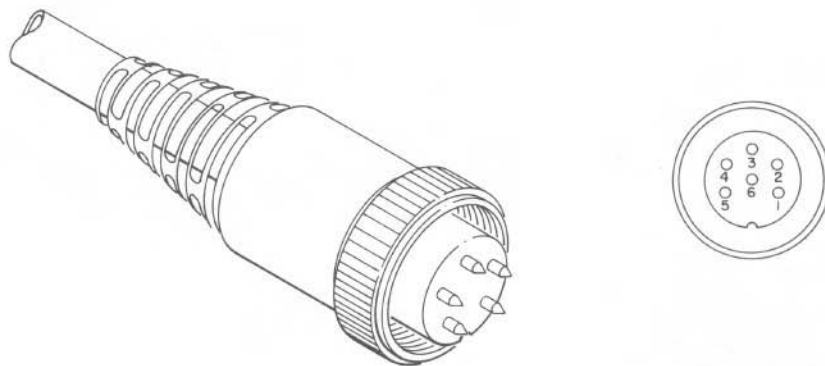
EXTRACTOR/SOLDERING IRON HANDPIECE CONNECTOR PLUG
